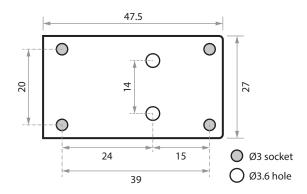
Docter/Noblex Standard Footprint All units in millimeters (mm)
